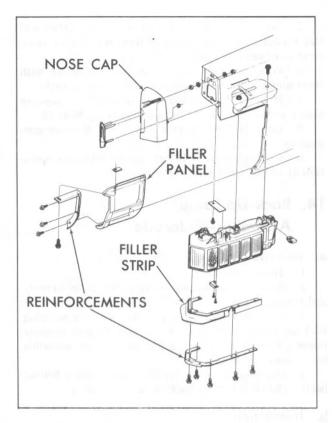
Front Signal Lamp Assembly - Eldorado
